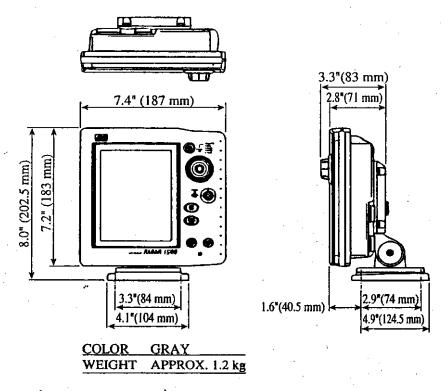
DISPLAY MOUNTING DIMENSIONS
